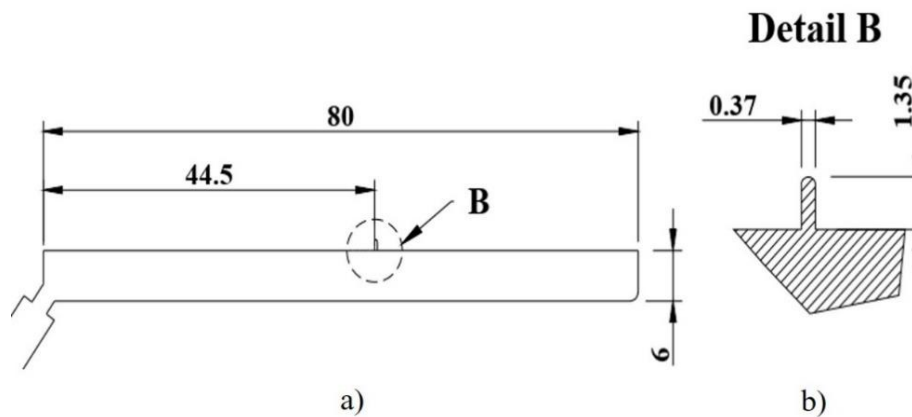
a) Part dimension in mm. b) Detail of the micro-groove in mm.
